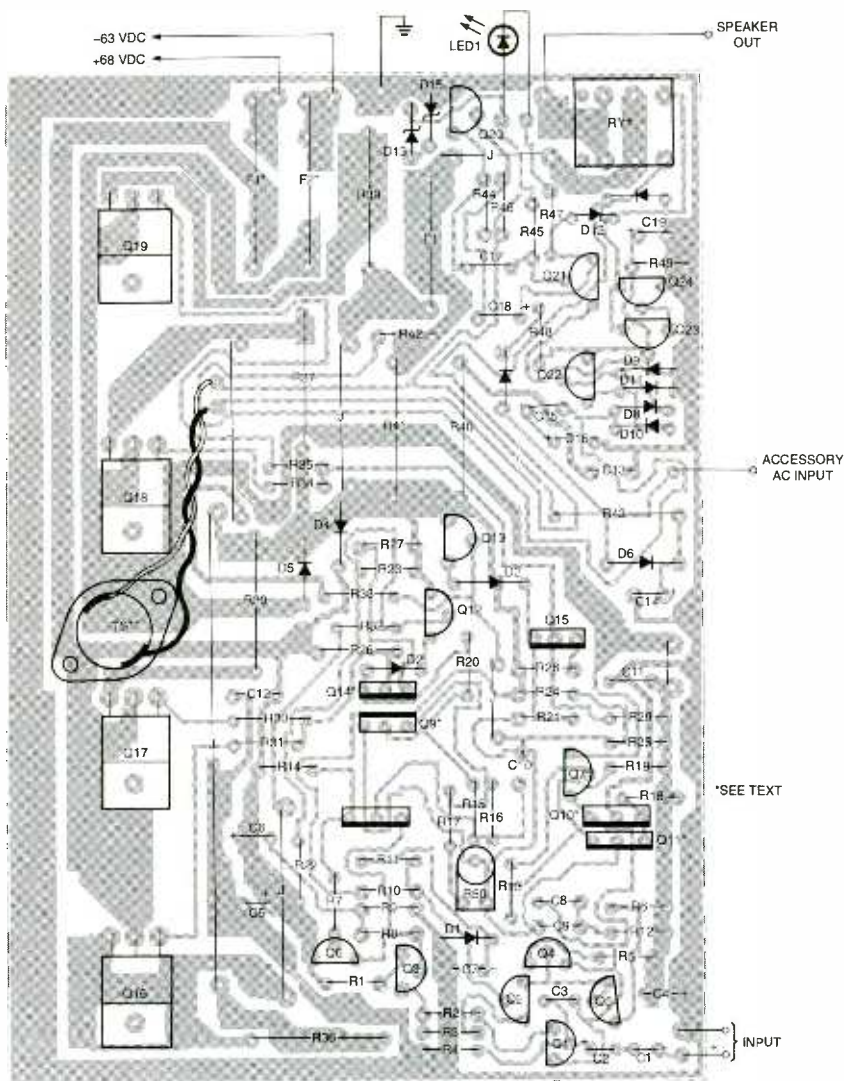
Assemble the amplifier's printed-circuit board guided by this parts-placement diagram. Note that the layout contains seven jumper connections, which should be installed first, allowing them to serve as a point of reference for the installation of the remainder of the components.
